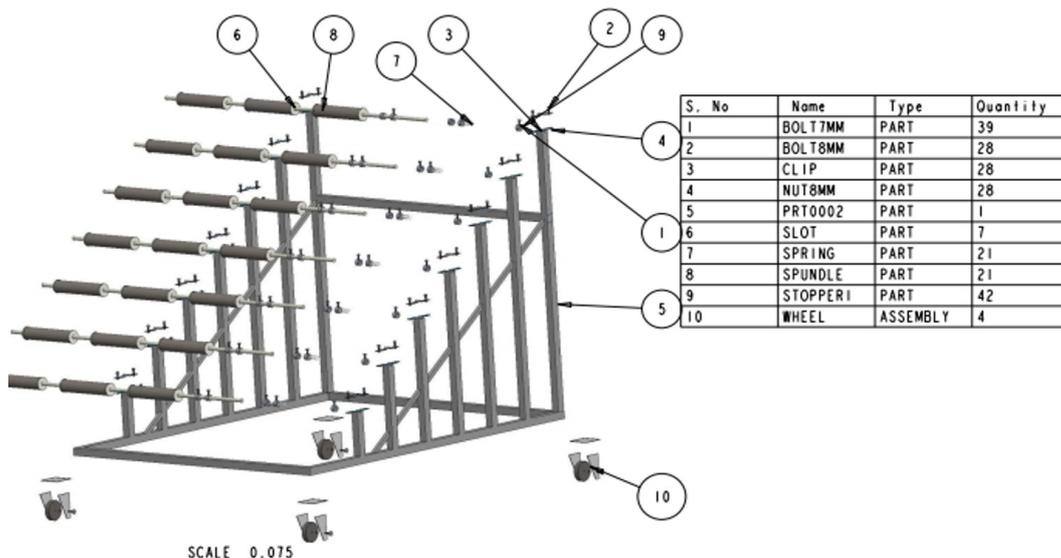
THREE DIMENSIONAL VIEW AND DIMENSIONS OF WARP CREEL
